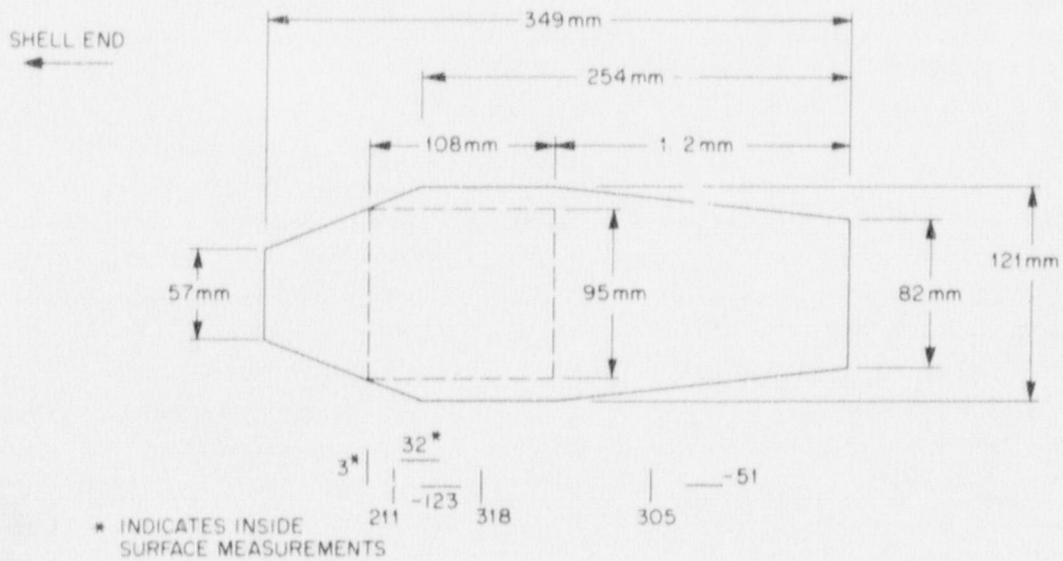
V-7B prototypical repair weld residual stresses (MPa) determined from weldable strain gage measurements.
